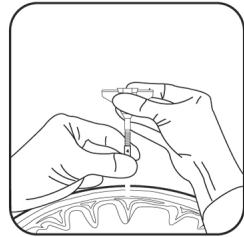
Select Bolt Stop size and slide onto bolt of the Bolt Assembly.
